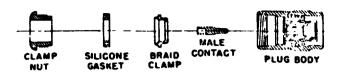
Attaching Plug UG-154A/U to Cable RG-18/U, Assembly Details
